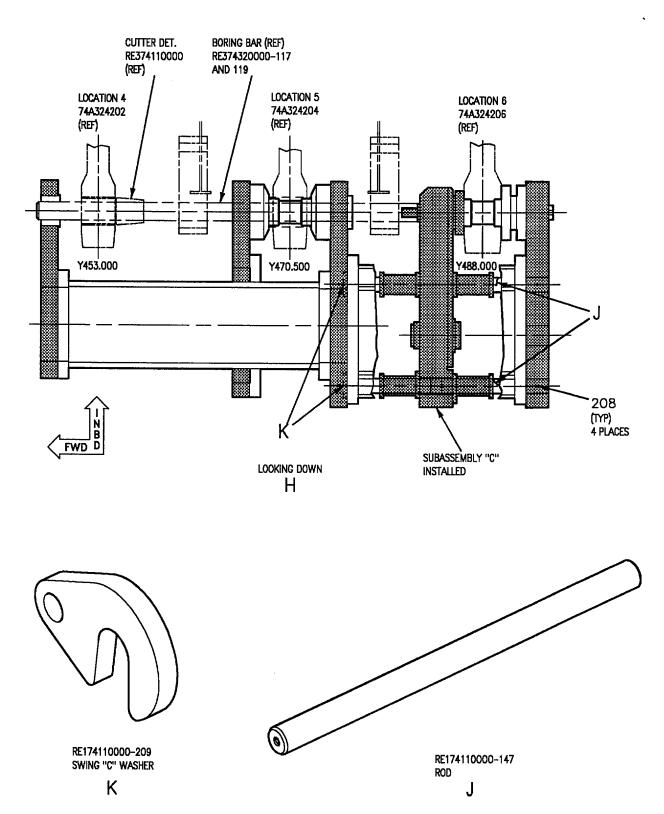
Setting Up to Machine I.D. of Bushing or Lug at Location 4, Y453.000 (Sheet 3)
